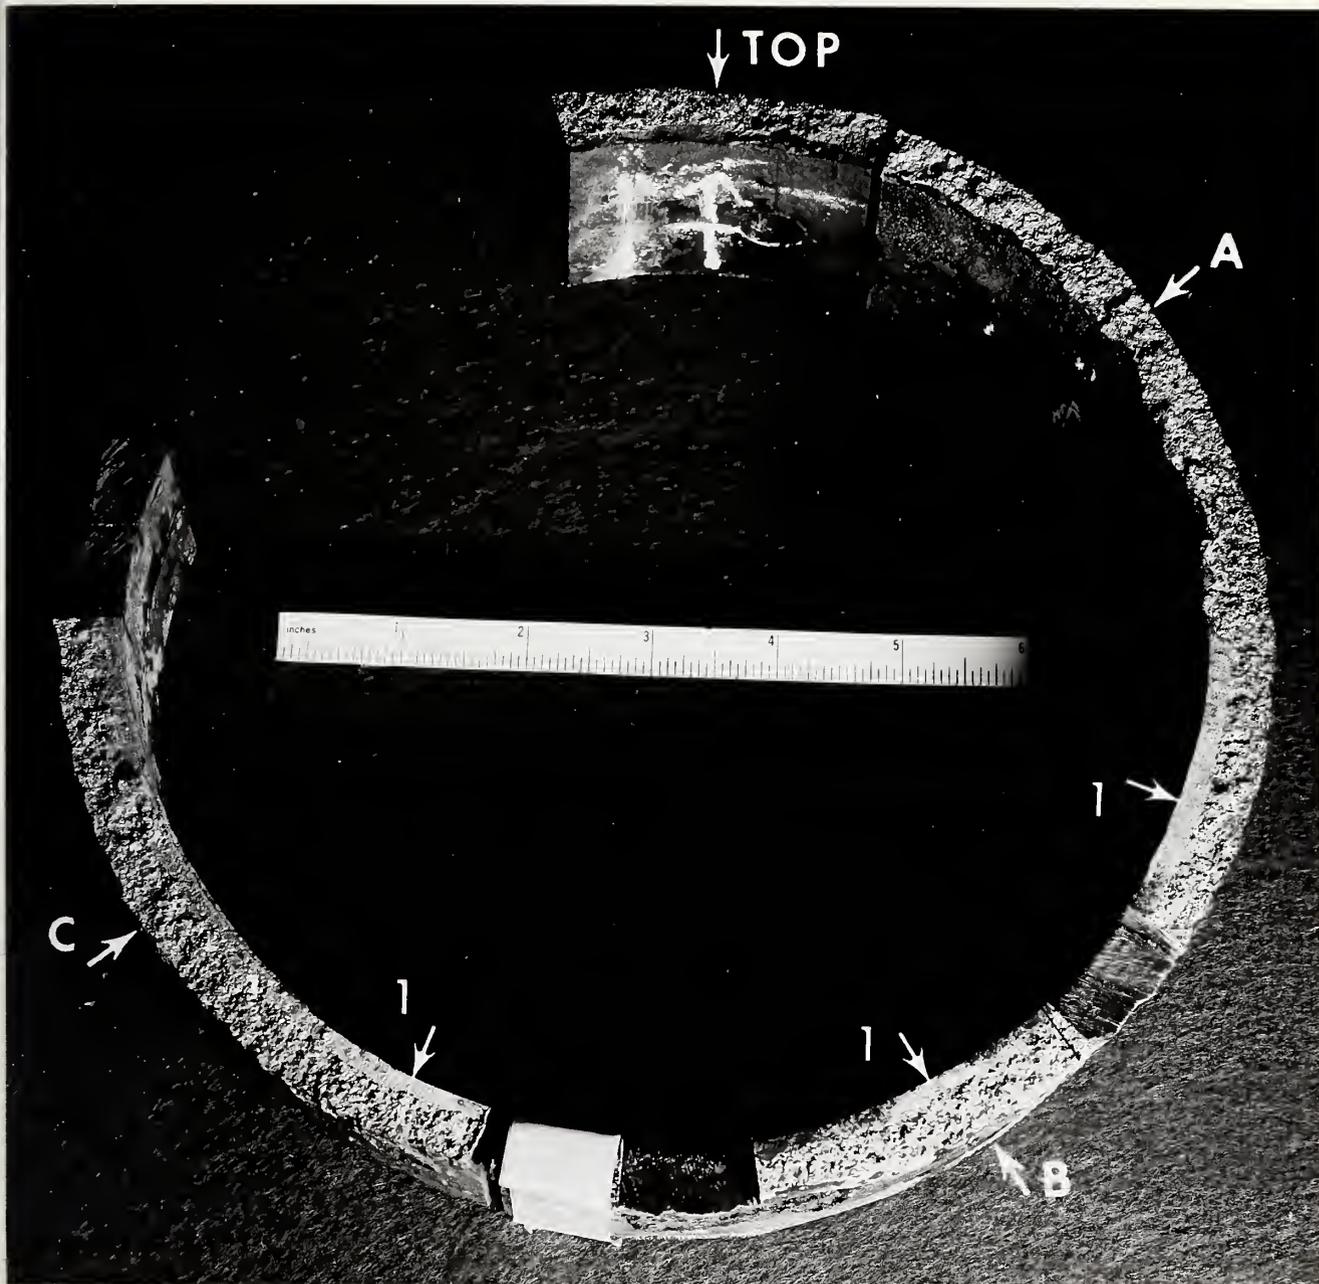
Part of the fracture surface of the pipe with several specimens having been removed. The lettered arrows indicate the same areas as in figure 4. Arrows 1 indicate general areas of incomplete weld penetration (flat areas on the fracture surface adjacent to the inside wall of the pipe).
